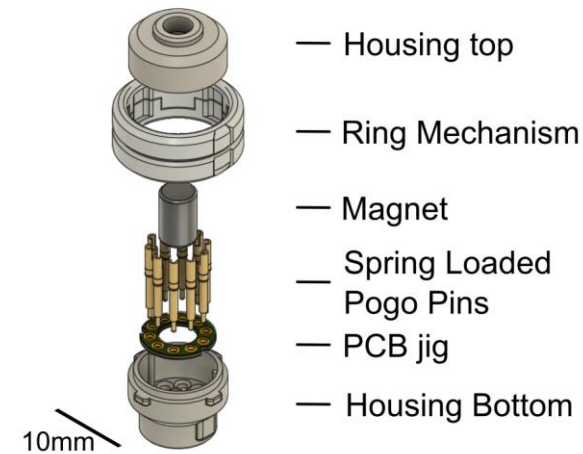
Diagram of the external connector assembly. 10 spring-loaded pins are placed in an aligning PCB and circle a large neodymium magnet, encased in a 3D printed ring mechanisms to assist with disconnection.
